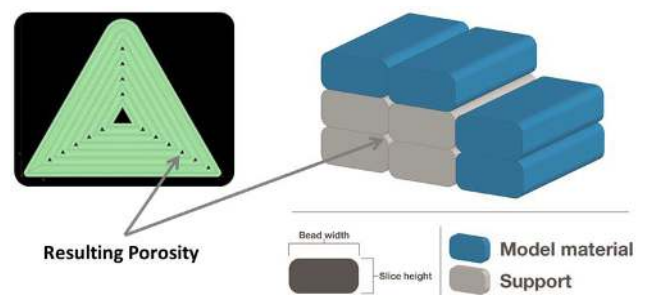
Top view of an example toolpath (left) and cross-section of bead profiles (right) showing inherent porosity in FDM parts.
